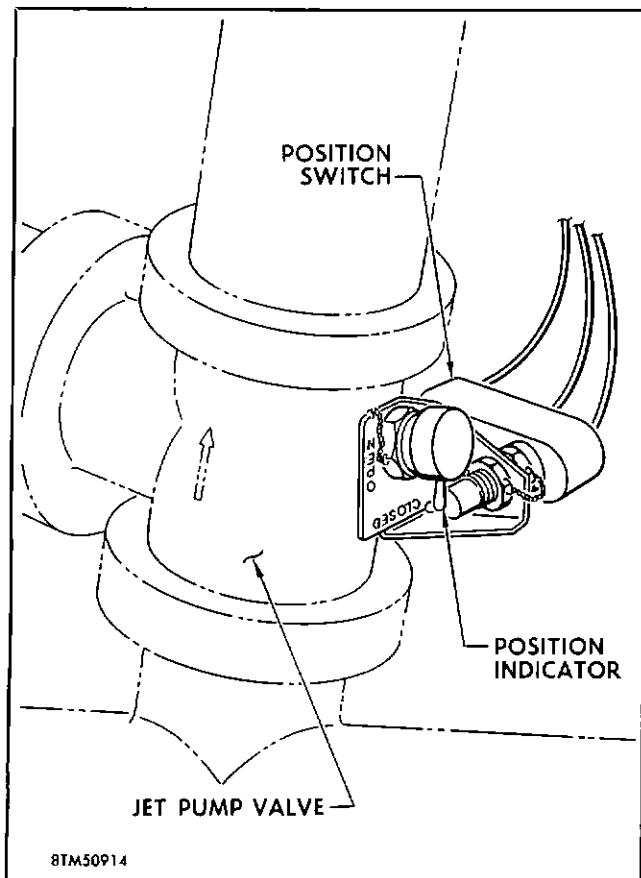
Jet Pump Valve Position Switch and Indicator
